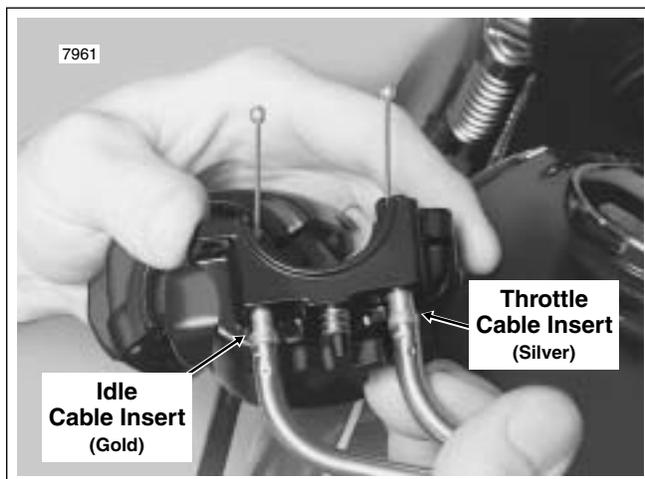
Install Throttle/Idle Control Cables in Lower Switch Housing
